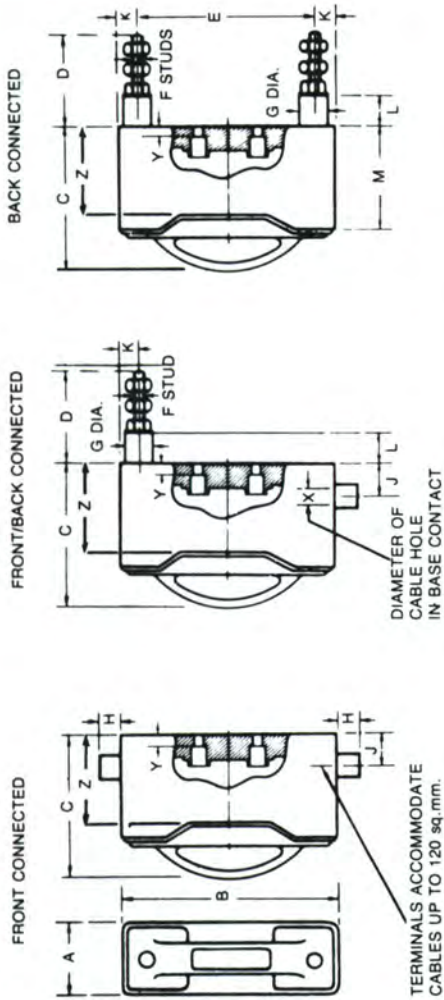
Cut-away view of 63 amp front connected contact assembly.
